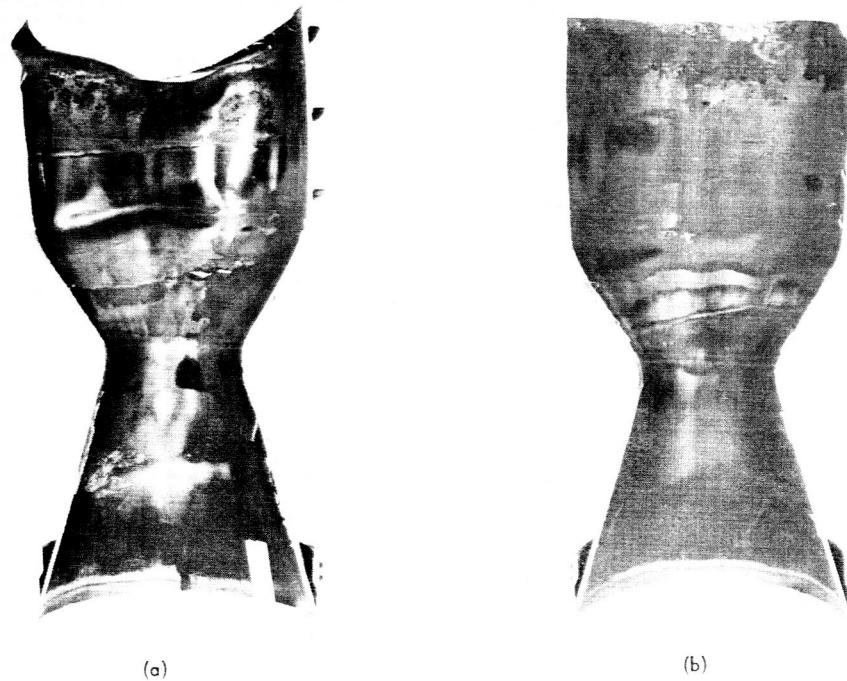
Thrust chamber cut in half: (a) internal view showing burned-through side; (b) internal view, opposite side.
